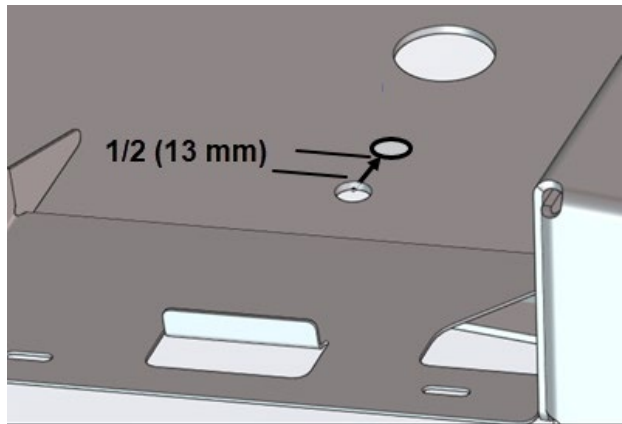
NEW HOLE FOR THE COOLING PACK MOUNTING SUPPORTS (DETAIL VIEW)
